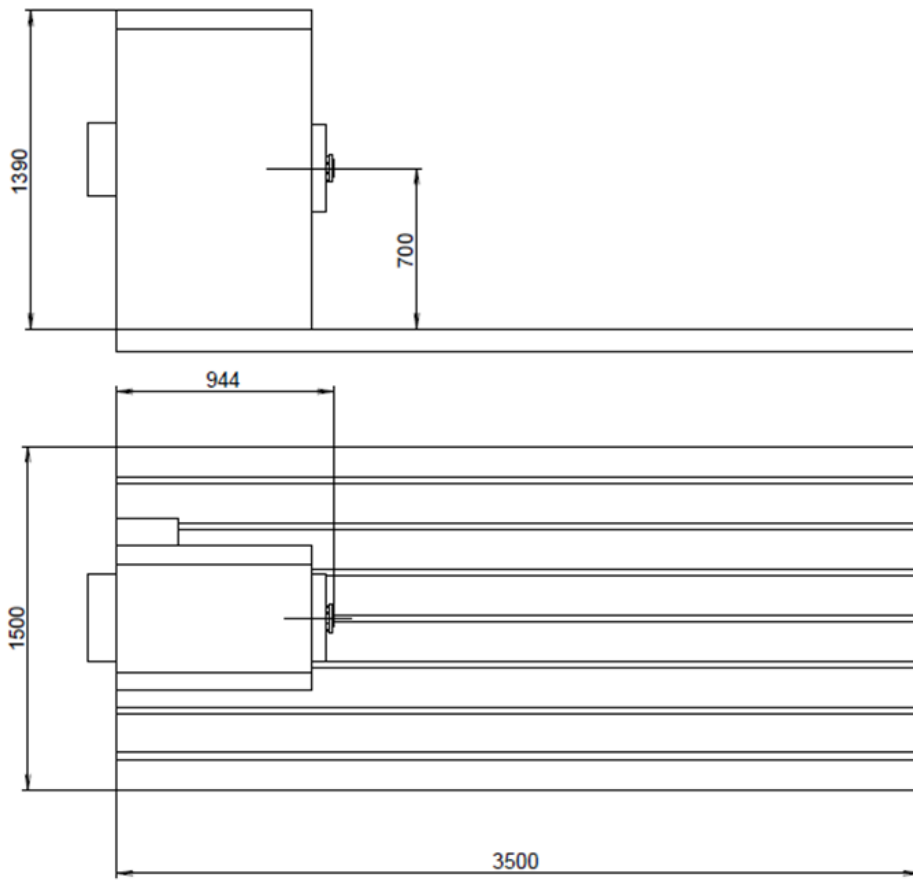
A view of the platform that the engine tilting stand will be built on, *David Svetlik, 2016
